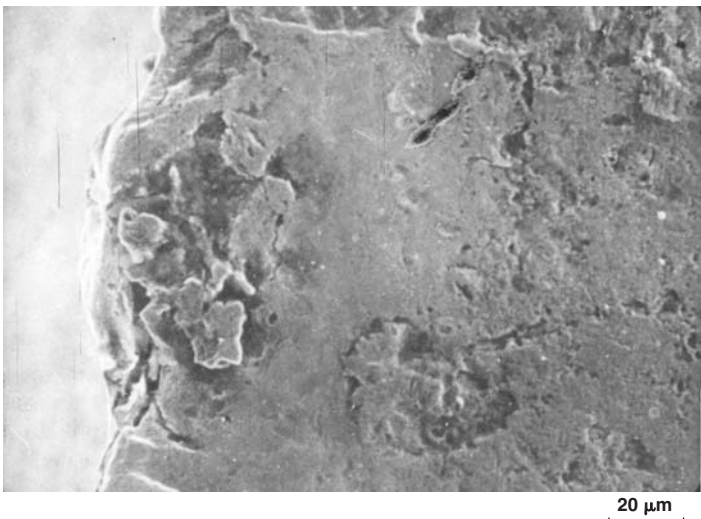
Fretting marks and debris at the fracture origin in some bolts
